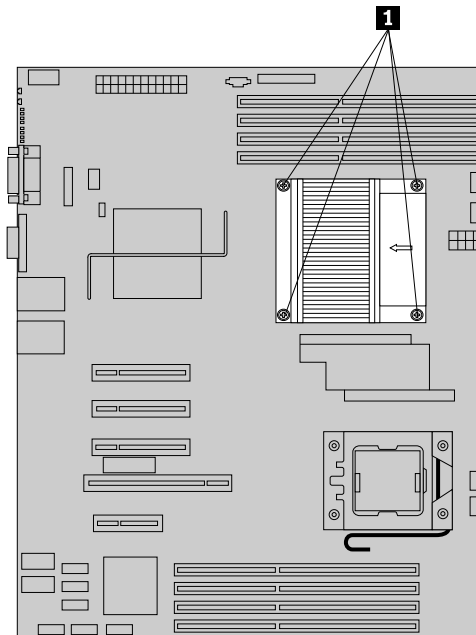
Screws that secure the heat sink and fan assembly for microprocessor 1
